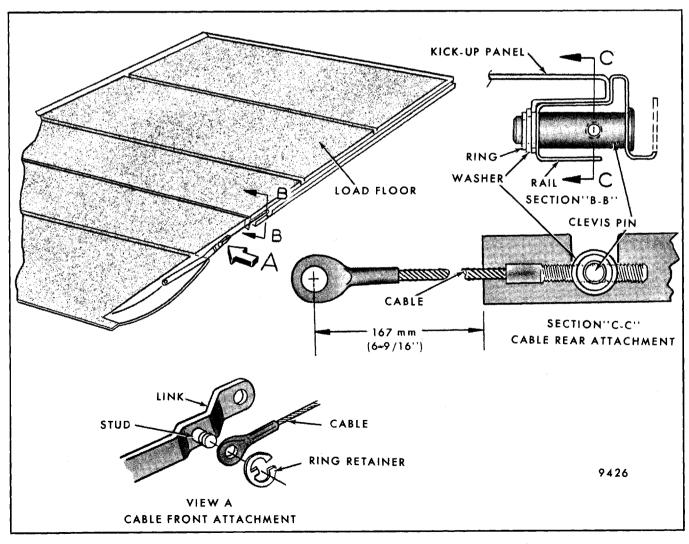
Folding Second Seat and Load Floor Cable Installation - B Styles
